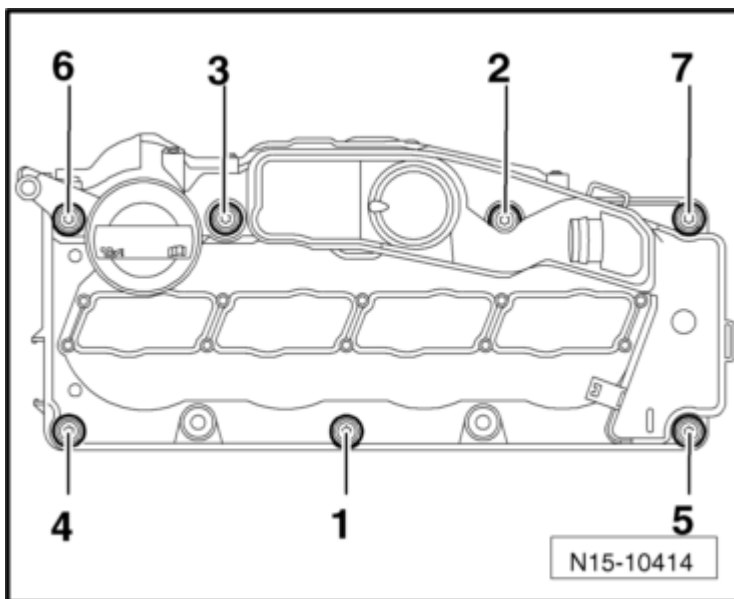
Identifying Head Cover Bolts -1 Through 7- Tightening Sequence
